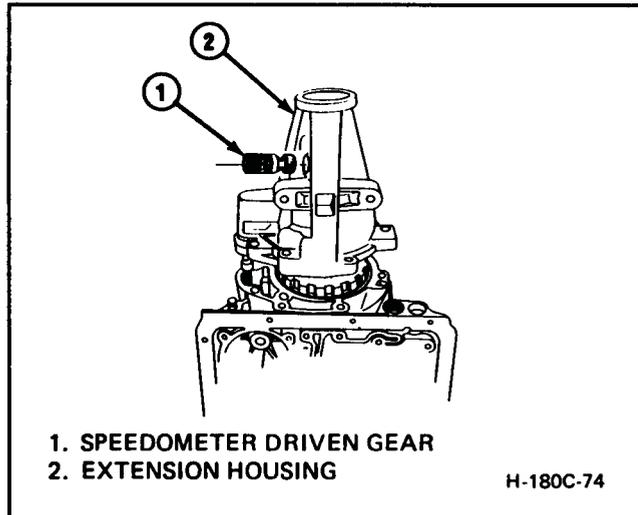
C-26 View of Extension Housing and Speedometer Driven Gear
